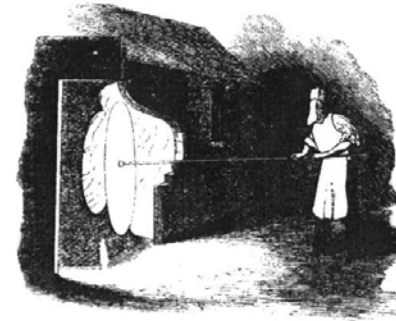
Expanding the open decanter shape to a 60-in.-diameter disk in the flashing furnace. (From ref 7.)
